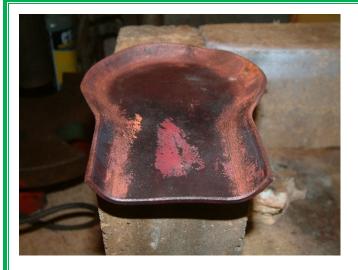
Backhead plate flange partly formed being returned to the forge for further annealing.
